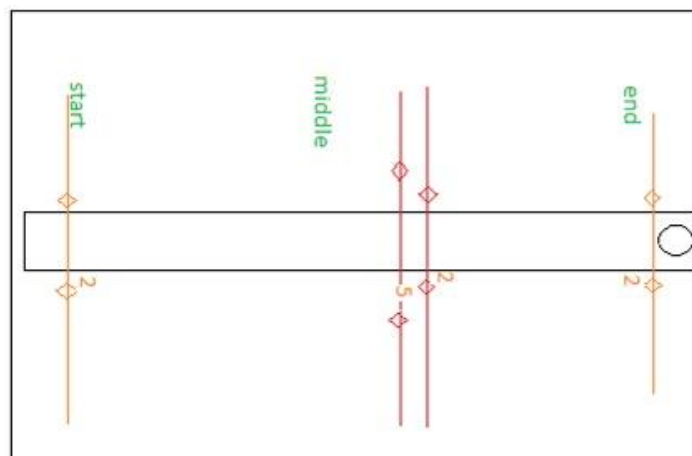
Positioning of the thermocouples in welded samples.
